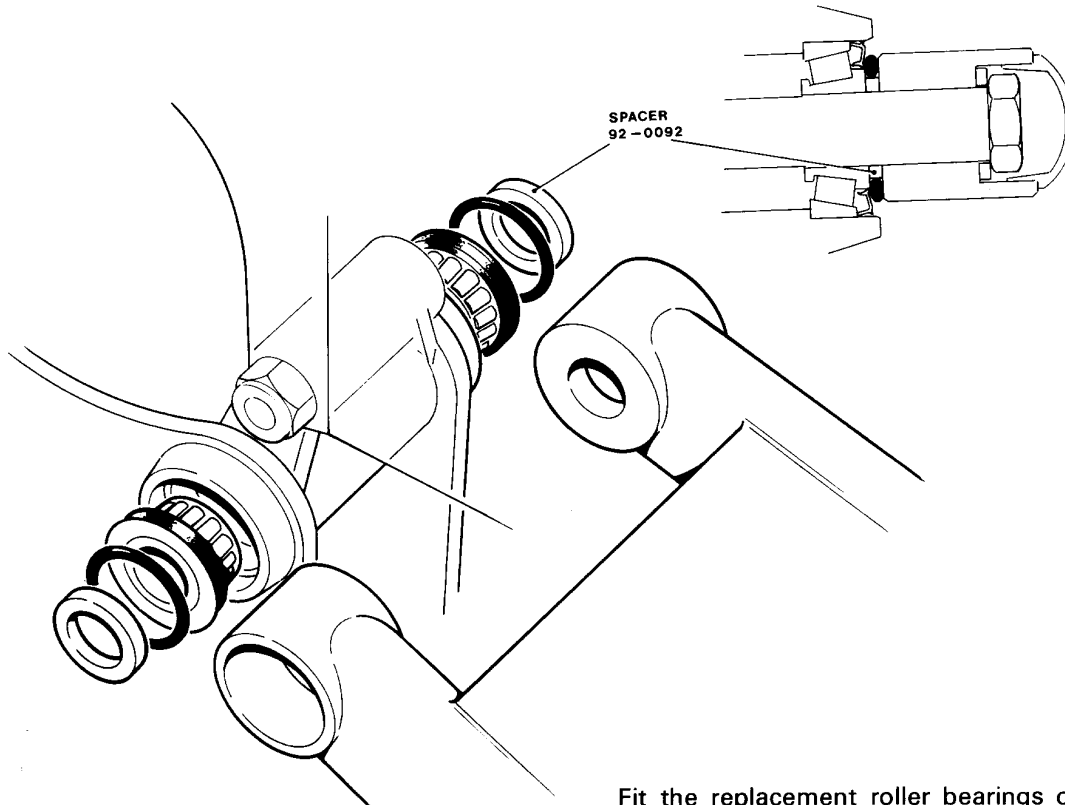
Shimming the Swinging Arm Pivot Bearings
